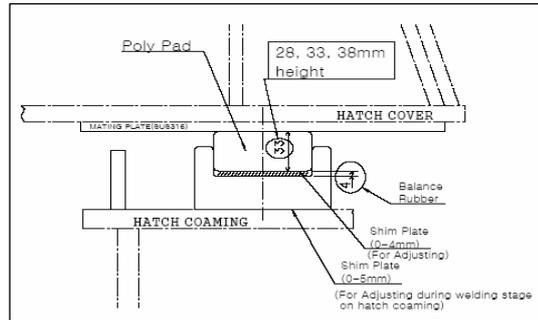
Installation drawing of bronze type bearing pad, before development
